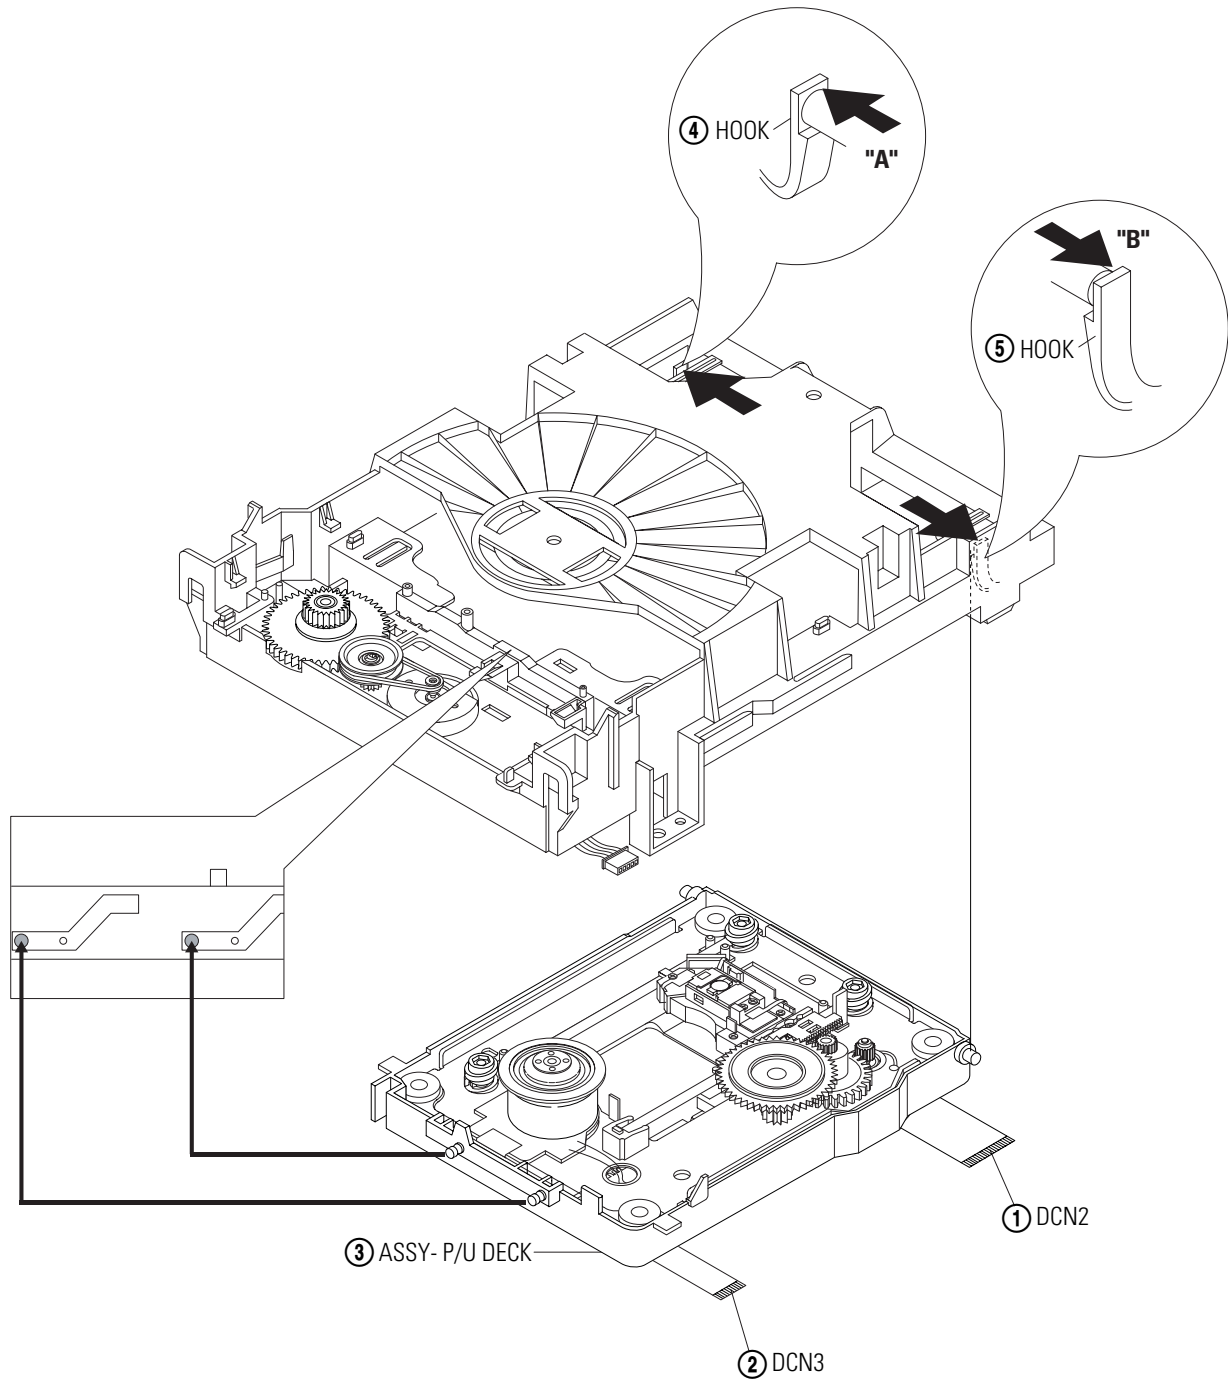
Disassembling the Assembly-Pickup Deck
